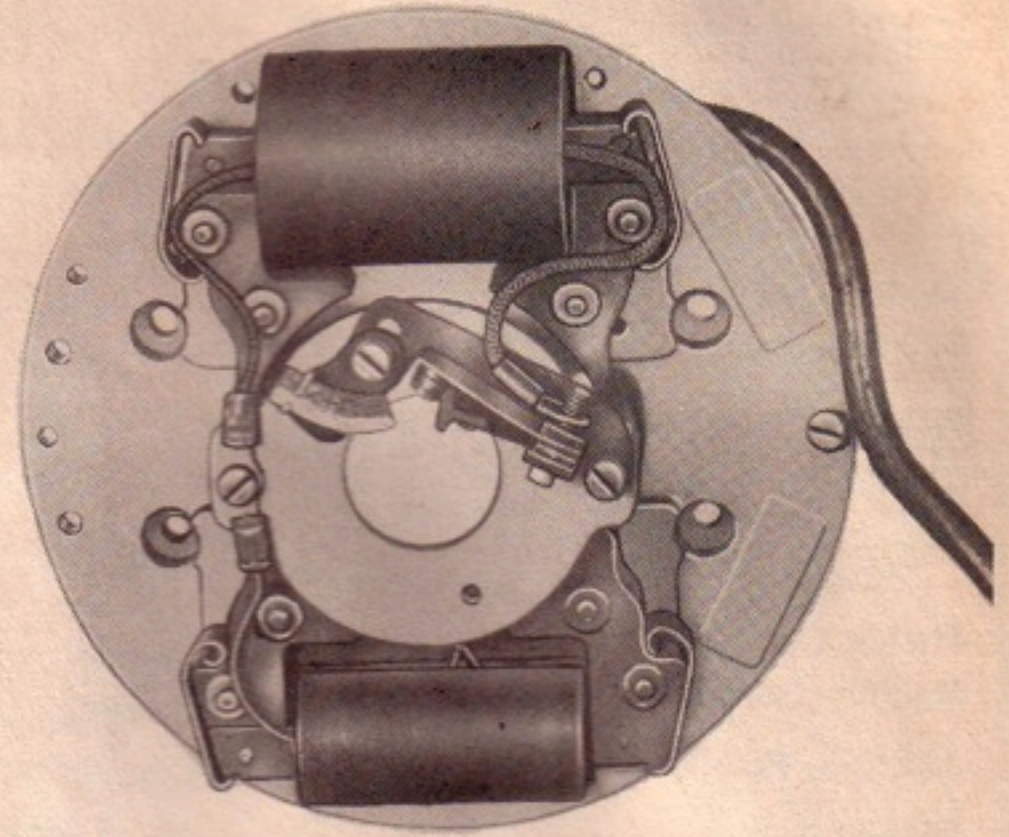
Scintilla-Equipped Bearing Plate With Lighting Coil Attached
